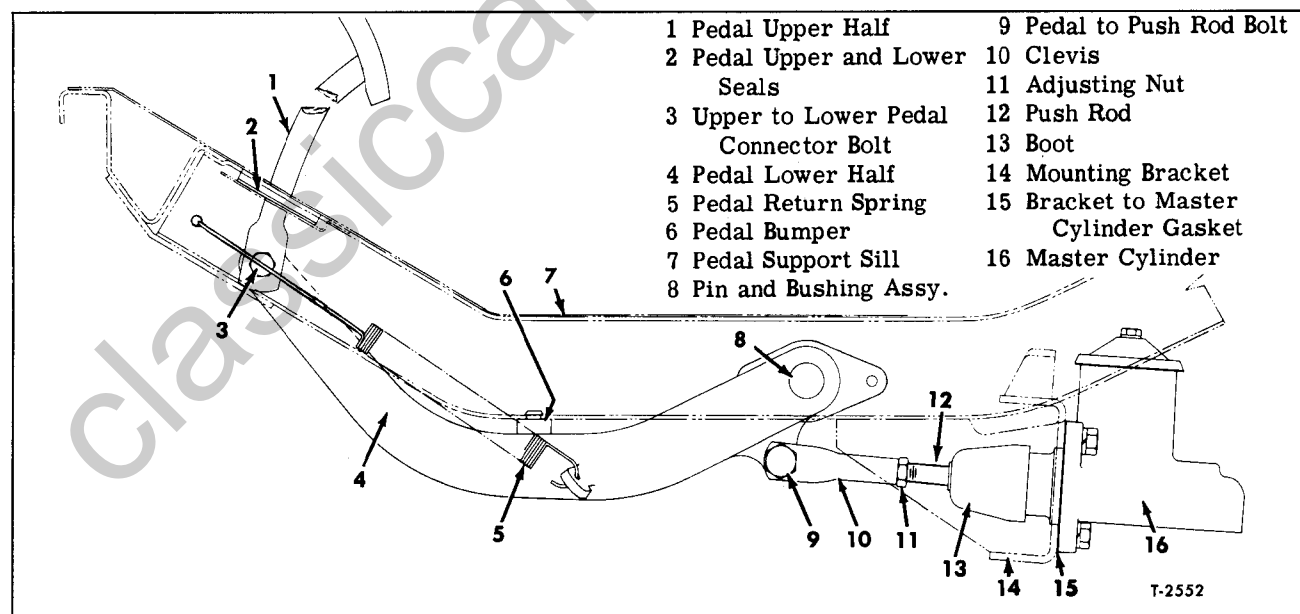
Brake Pedal and Master Cylinder Installation (Tilt Cab Models)
